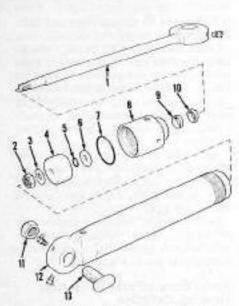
Exploded view of steering cylinder used on 1490 and some 1690 models. Note differences in end cap (8) and seals (9 and 10) of this cylinder and similar cylinder pictured in Fig. 44.
